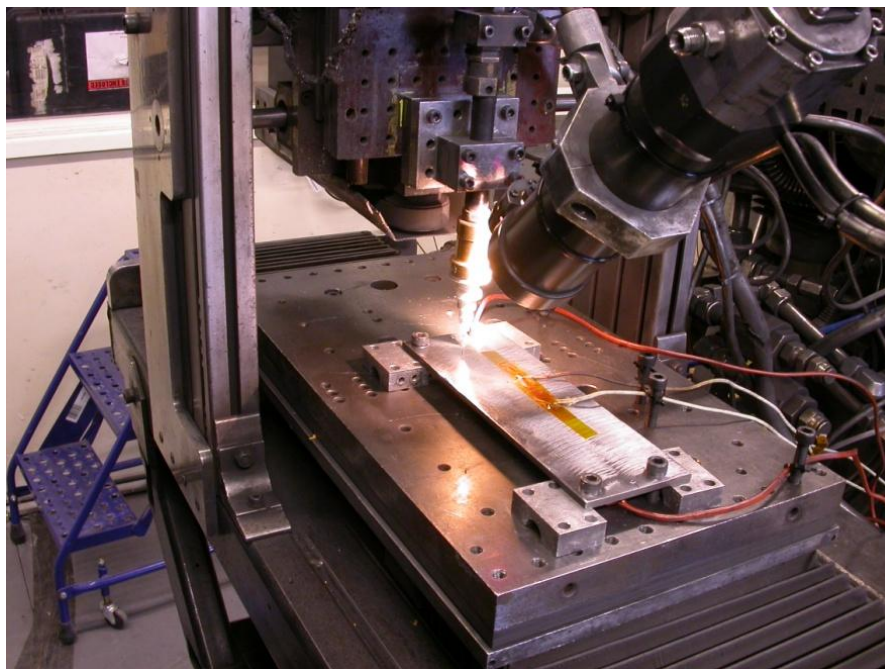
Photograph of completed weld on a 5 mm thick mild steel section
